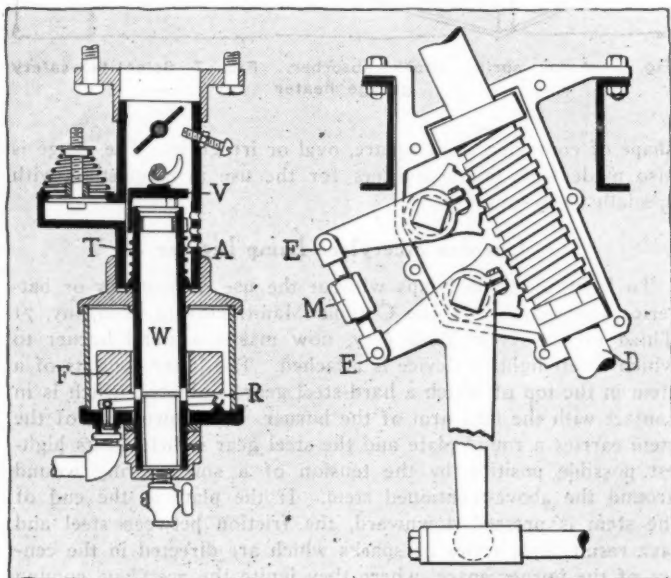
Morris-Merritt wick-feed carburetor. Fig. 2—Moore steering gear
